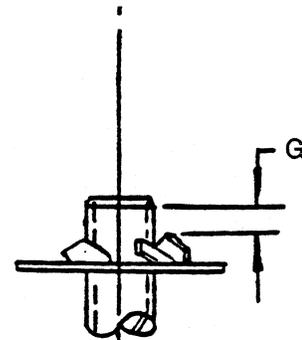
PUSH-ON SPRING BOLT RETAINER
